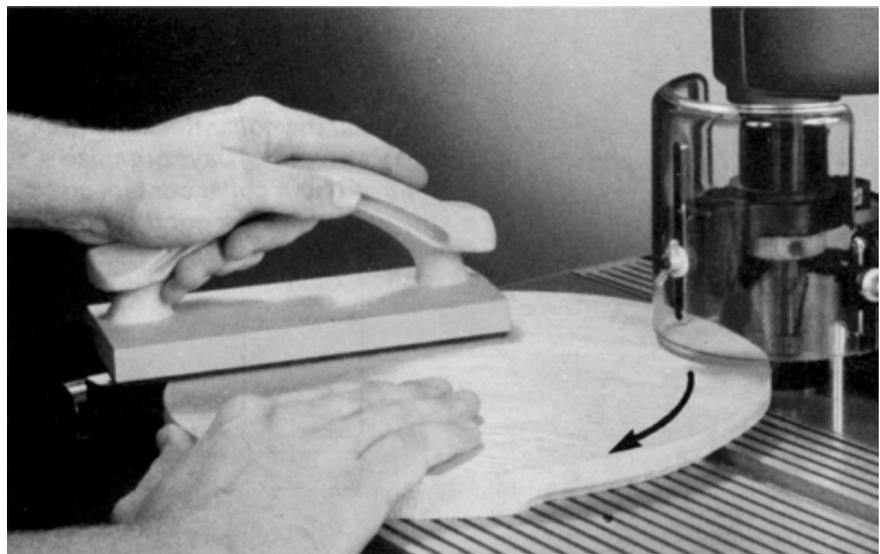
The pass can be made with the workpiece against the collar. Move the workpiece slowly in a clockwise direction.
